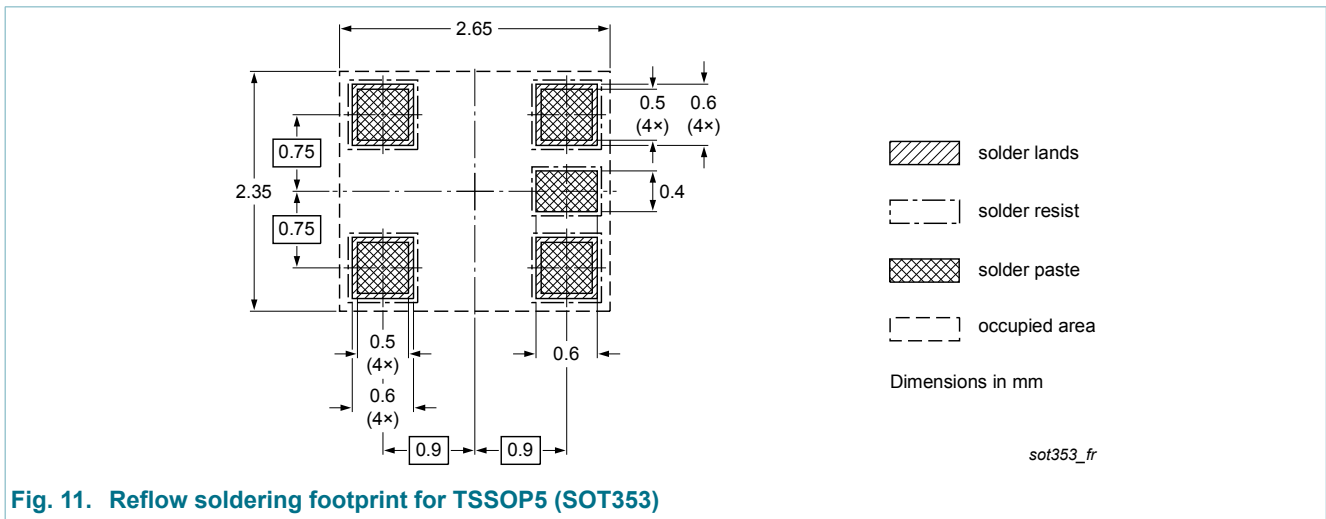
Reflow soldering footprint for TSSOP5 (SOT353)
